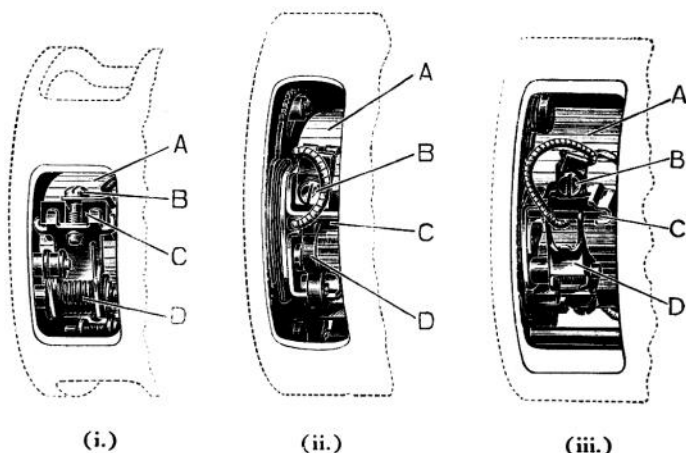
Dynamos with End Covers removed to show Brushgear and Commutator.
